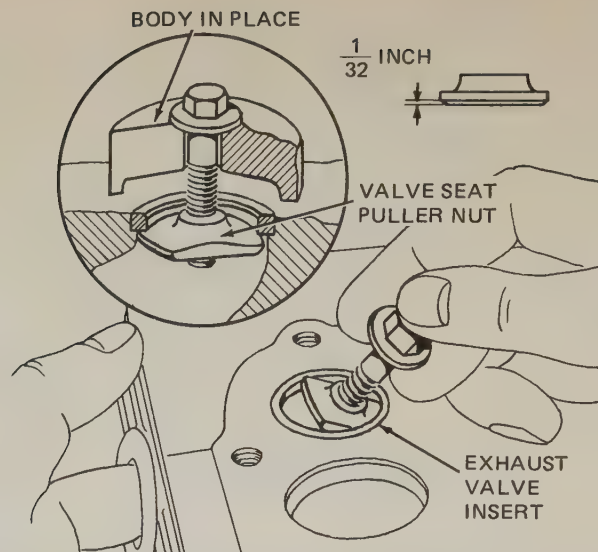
Inserting the valve-seat-insert puller. (Briggs & Stratton Corporation)
